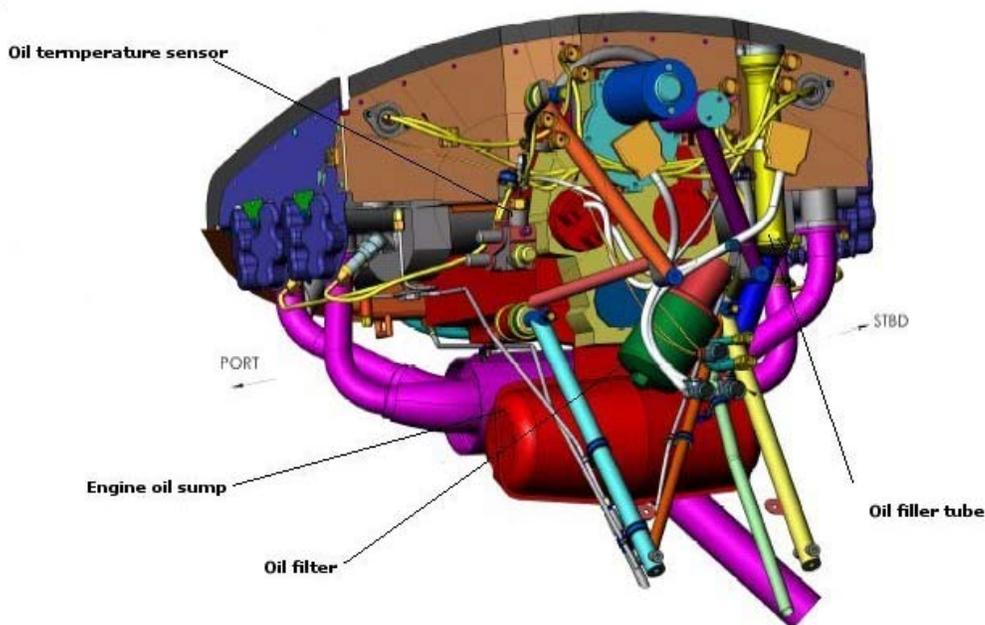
Cut-A-Way View of Engine and Oil Related Components
